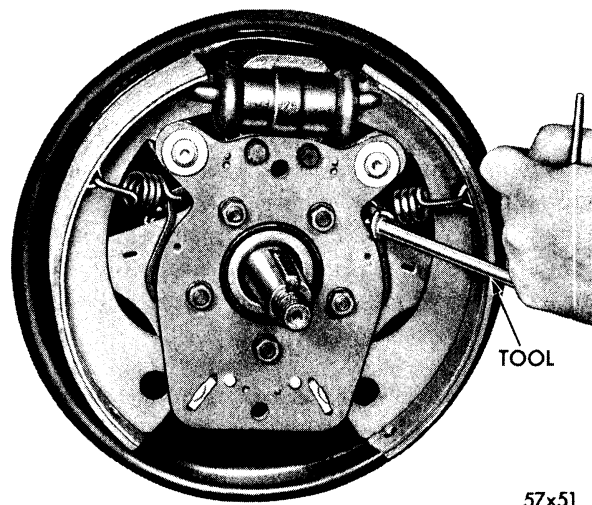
Removing Rear Brake Shoe Return Spring with Tool C-3462
